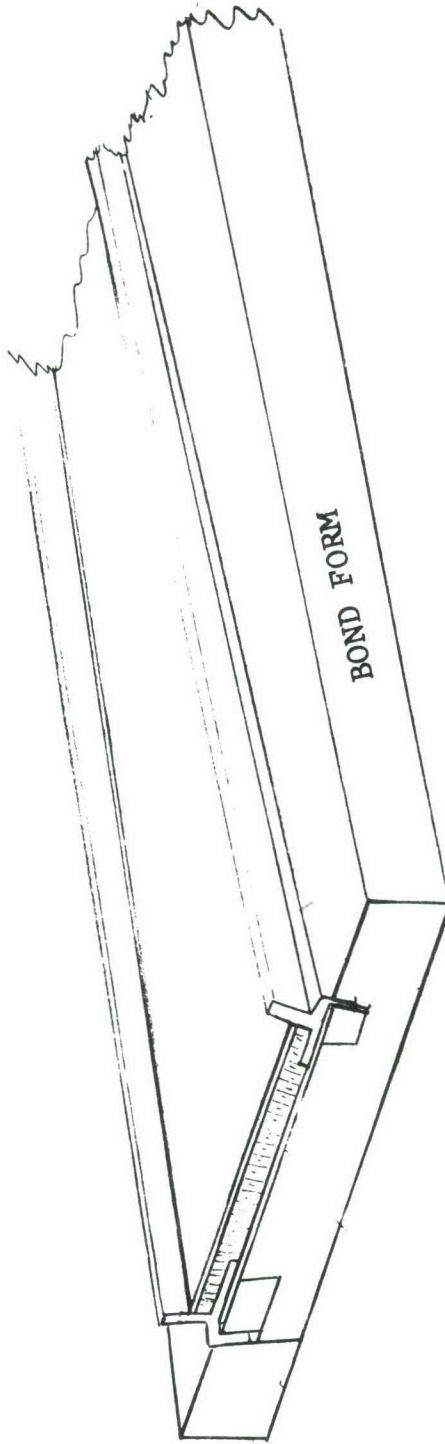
, Secondary Manufacturing Front & Rear Spars Adhesive Bonded Assembly
